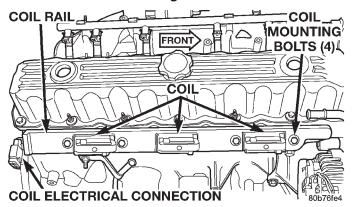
Ignition Coil Rail Location—4.0L 6–Cylinder Engine
